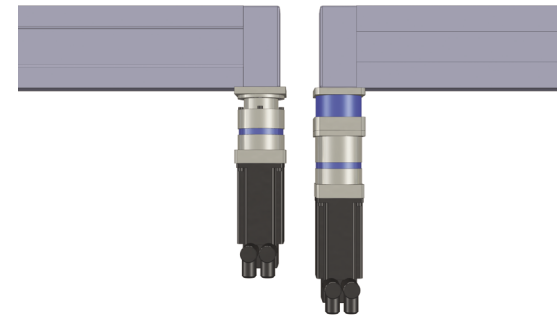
Hollow output inline gearbox (left) has a shorter overall length compared to a gearbox with coupling (right), saving space.
